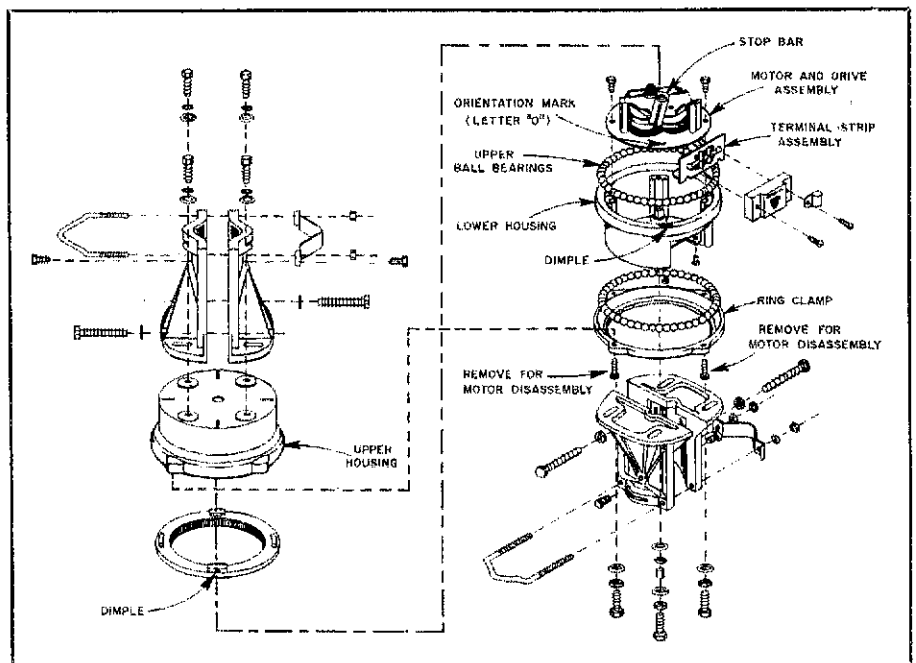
Exploded view of the HD-73 motor unit (diagram courtesy of the Alliance Manufacturing Company).
